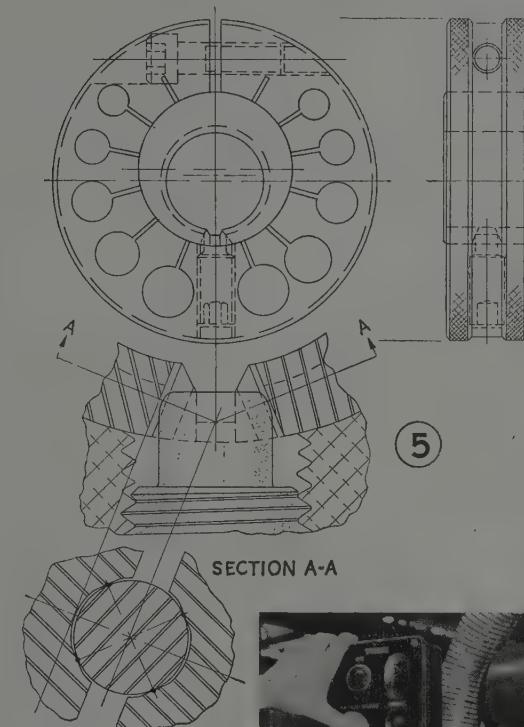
Flat and edge drawings of adjustable thread ring gage with steel insert in aluminum shell. Enlarged sections show four contact points of counterlock screw. Specially shaped hole is formed in a coining press before the insert is drilled and slotted
